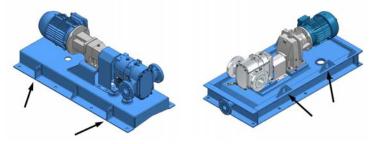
Reference location for equipment and baseplate lifting lugs
